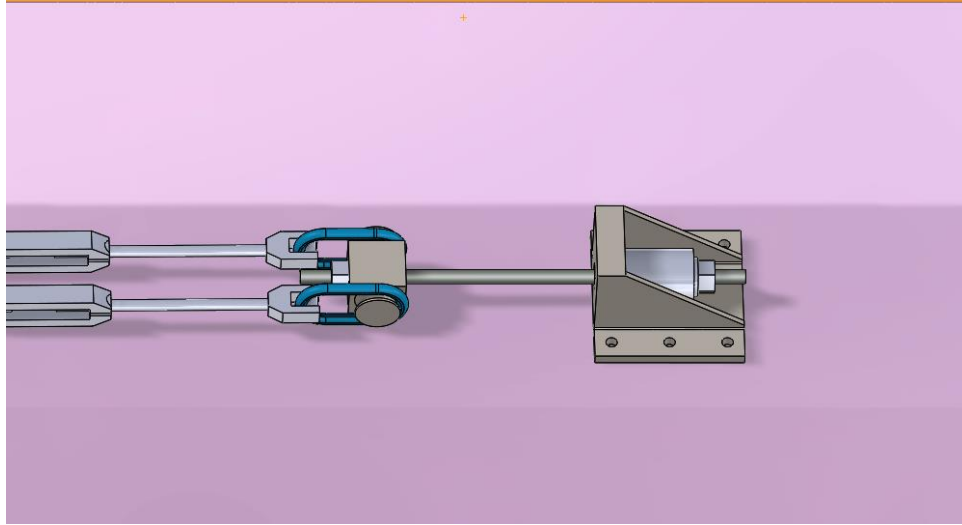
Passing threaded rod through hydraulic cylinder and spreader block
